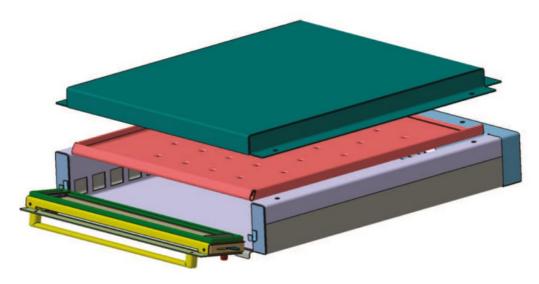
CAD design of the first version of Visentin air impingment prototype (© courtesy of Alberto Visentin).
